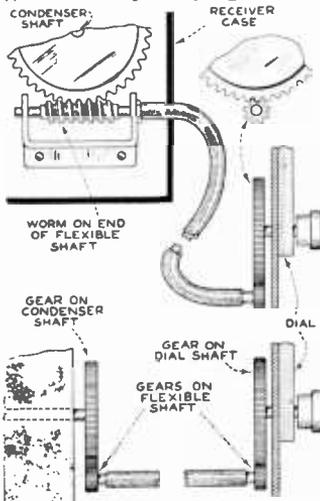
Some methods for gearing the tuning control to the condenser shaft are shown here.
